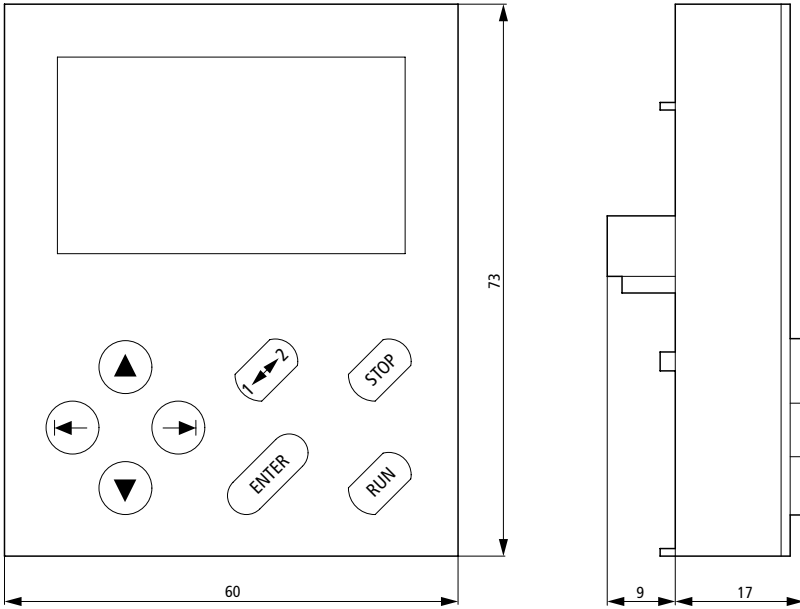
Dimension drawing, LCD keypad DE4-KEY-3
